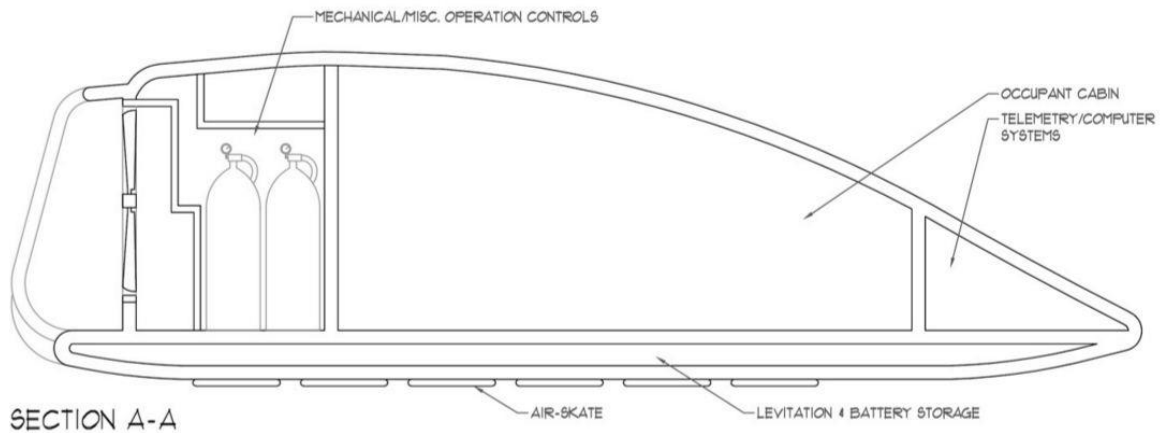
D: Sketch of possible pod interior side profile. There will be up to 8 tanks of compressed air, and instead of the 6 skates shown on the side, there will be 3 oval shaped skates.
